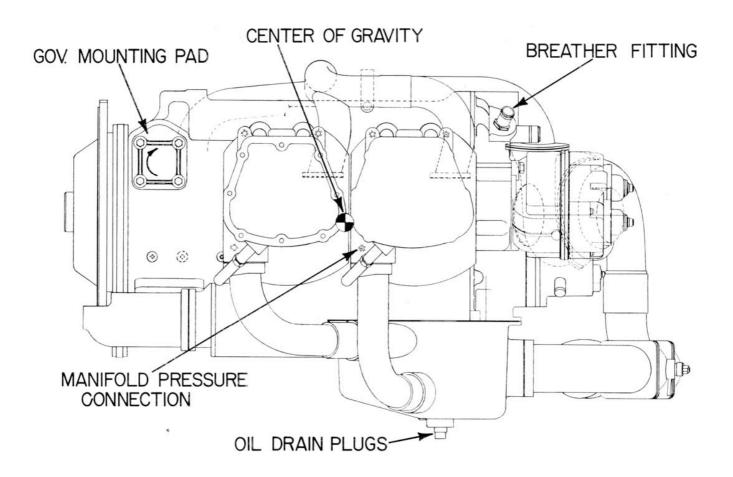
Installation Drawing – Left Side View – TO-360-C
